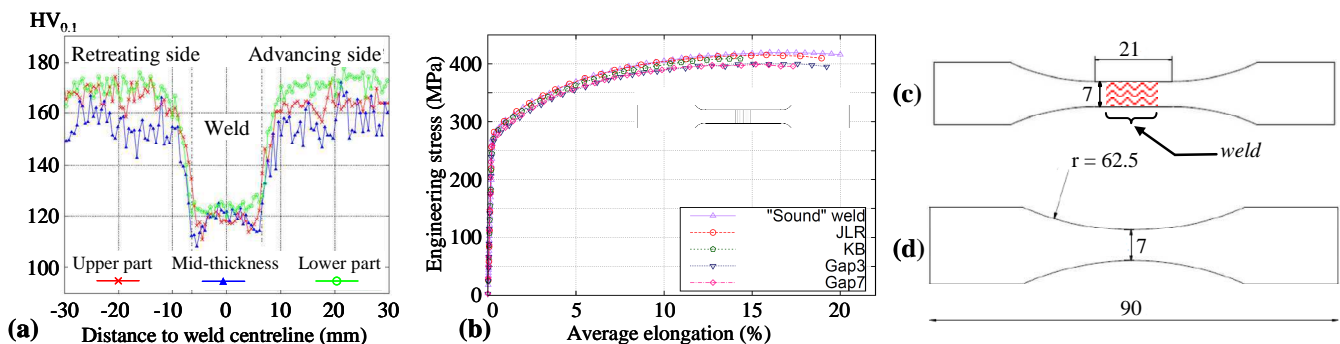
(a) Hardness profiles across a sound weld. (b) Tensile curves of the various kinds of welds. Drawings of full-thickness (c) cross-weld and (d) base metal fatigue specimens (dimensions in mm)
